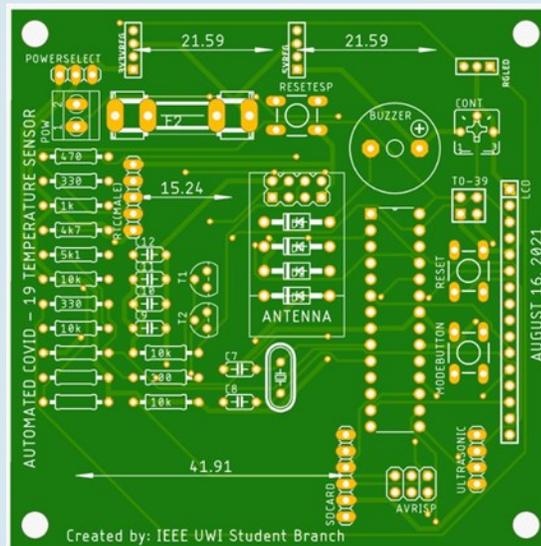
Image of PCB for the COVID-19 Contactless Temperature Measurement Device
